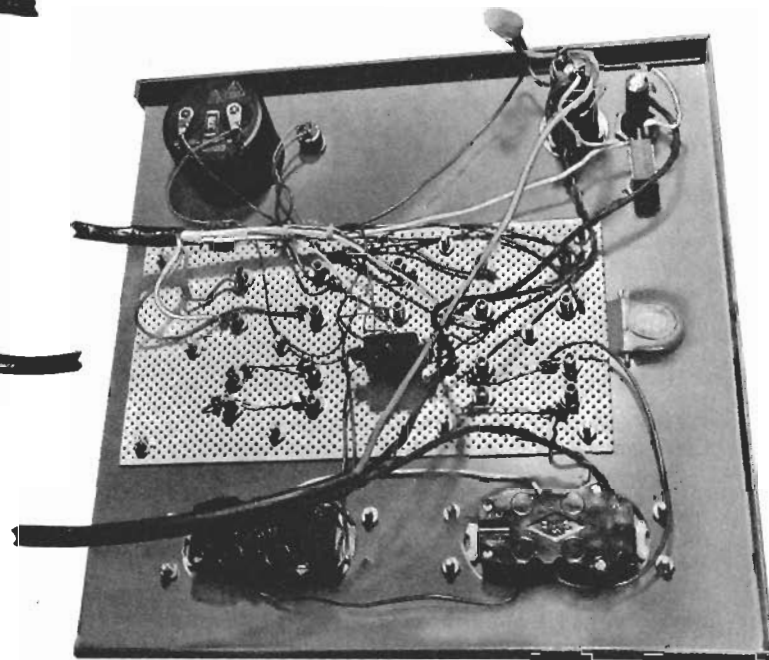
This view shows the bottom of the board in the prototype with point-to-point wiring using No. 14 stranded copper hookup wire.
